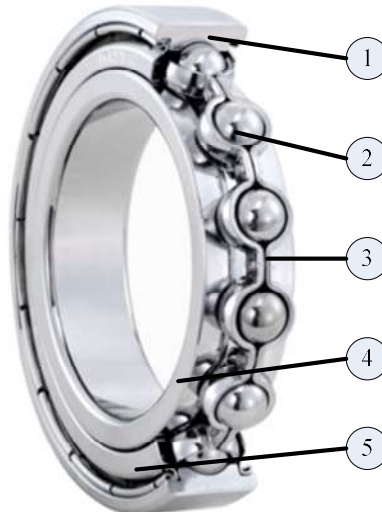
A rolling element bearing structure: (1) outer ring, (2) rolling element, (3) cage, (4) inner ring,(5) bearing seal.
